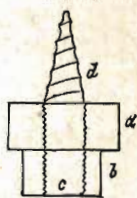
Side-screw washer, full size. *a*, countersink; *b*, hole for screw.
